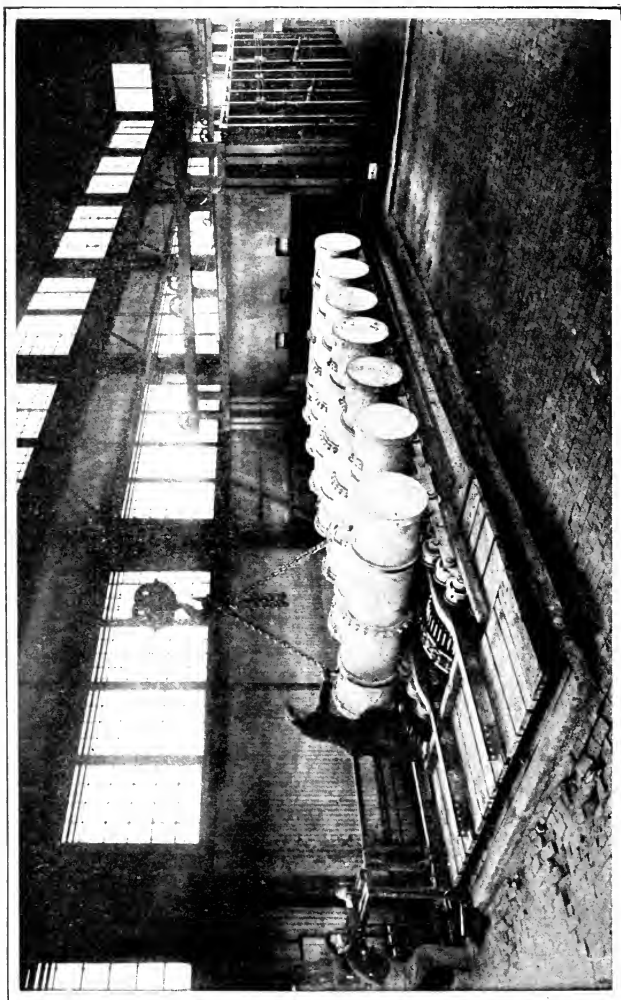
VIEW OF LOADING END OF ONE OF THE LARGEST SHERARDIZING FURNACES IN THE WORLD
